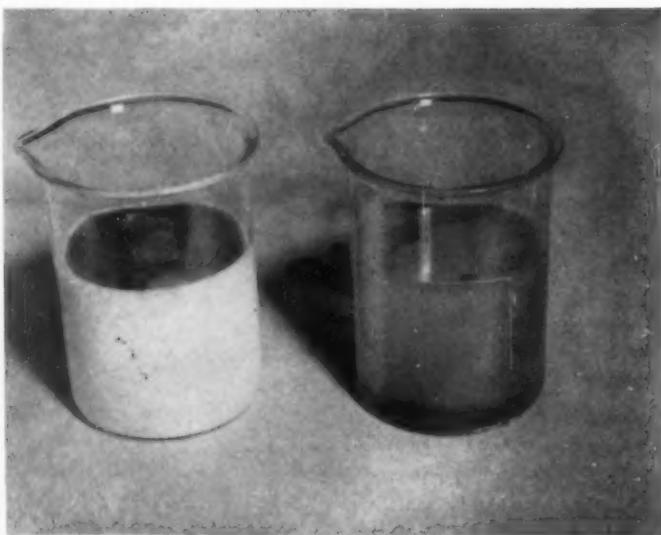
Cast-iron chips float on a conventional water-soluble coolant, left, but immediately settle out of the high-wetting and dispersing soluble because their surfaces are wetted.
